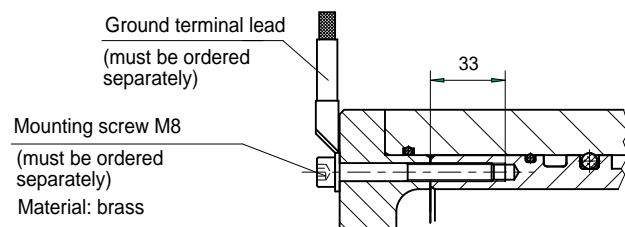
1MS 375 stator - dimensional data (part 2)
